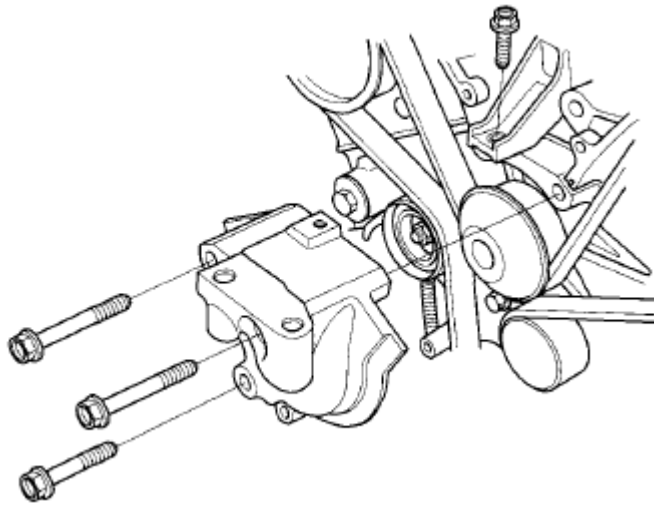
Removing Lower Half Of Side Engine Mount Bracket
